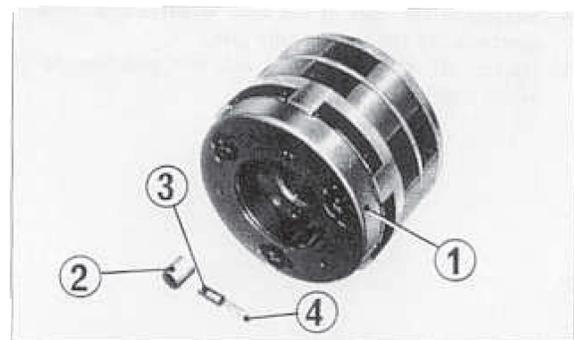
(1) Starting clutch outer (2) Roller (3) Roller cap (4) Spring
